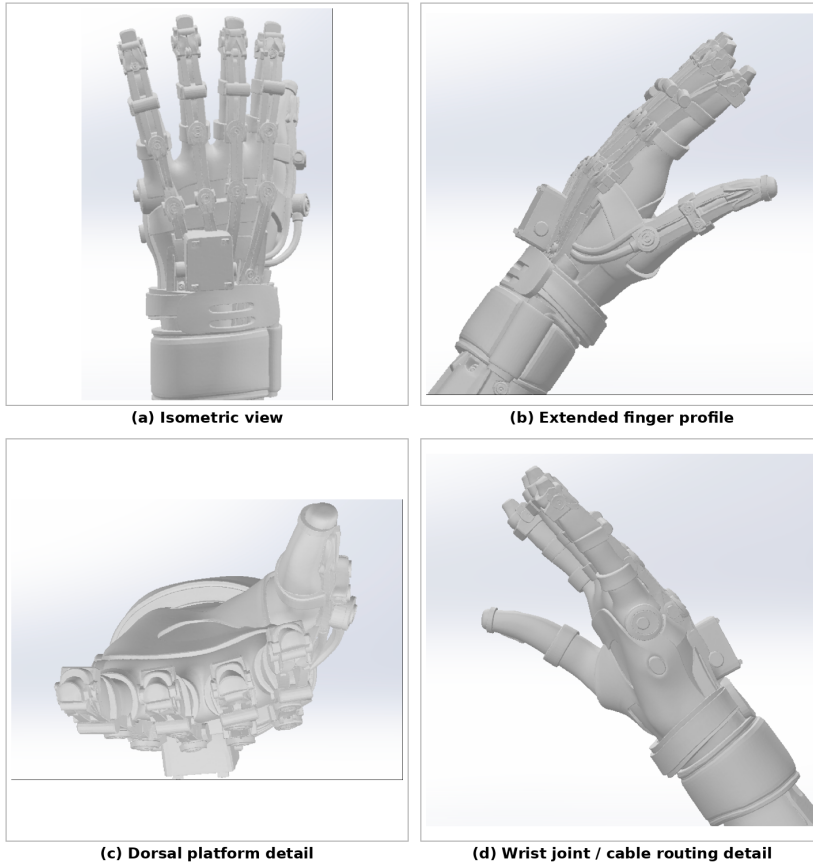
CAD renderings of the exoskeleton frame. (a) Isometric view of the assembled structure. (b) The chains in extension, showing the three links per finger and the two revolute joints between them. (c) The dorsal platform detail. (d) The thumb chain and wrist interface. The renders show the printed frame in isolation: the servo actuators, tendons, PTFE liners, wrist strap, and the clearance envelope for the wearer's own fingers are omitted for legibility.
